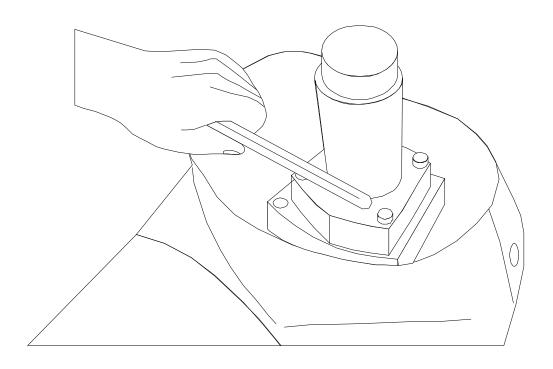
TIGHTEN HIP JOINT SHOULDER BOLT
